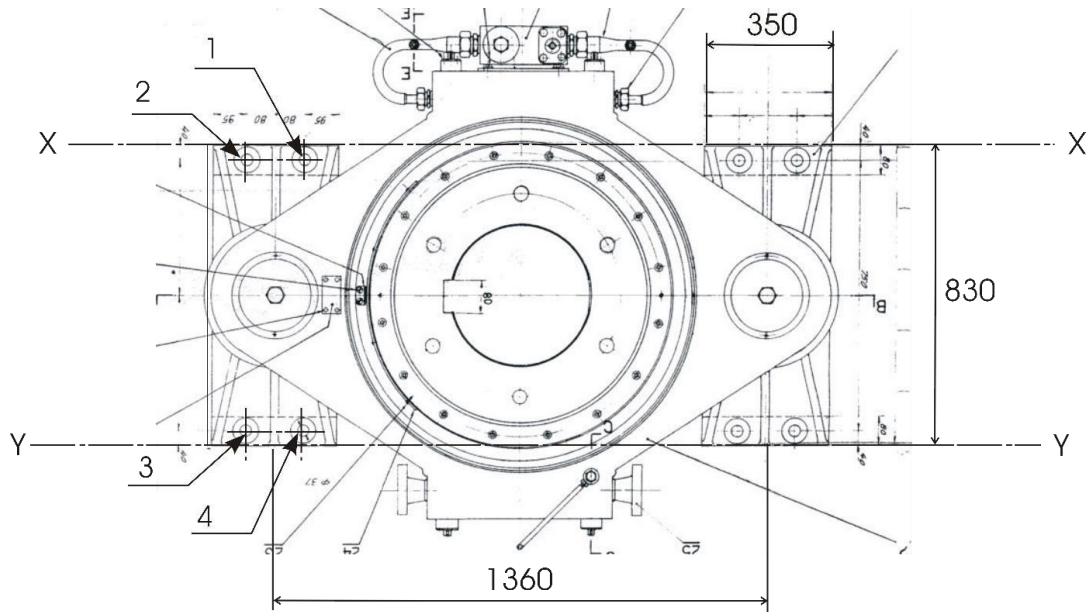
Dimensions of the joint plates between the oil-pressure rotary actuators and the hull.
